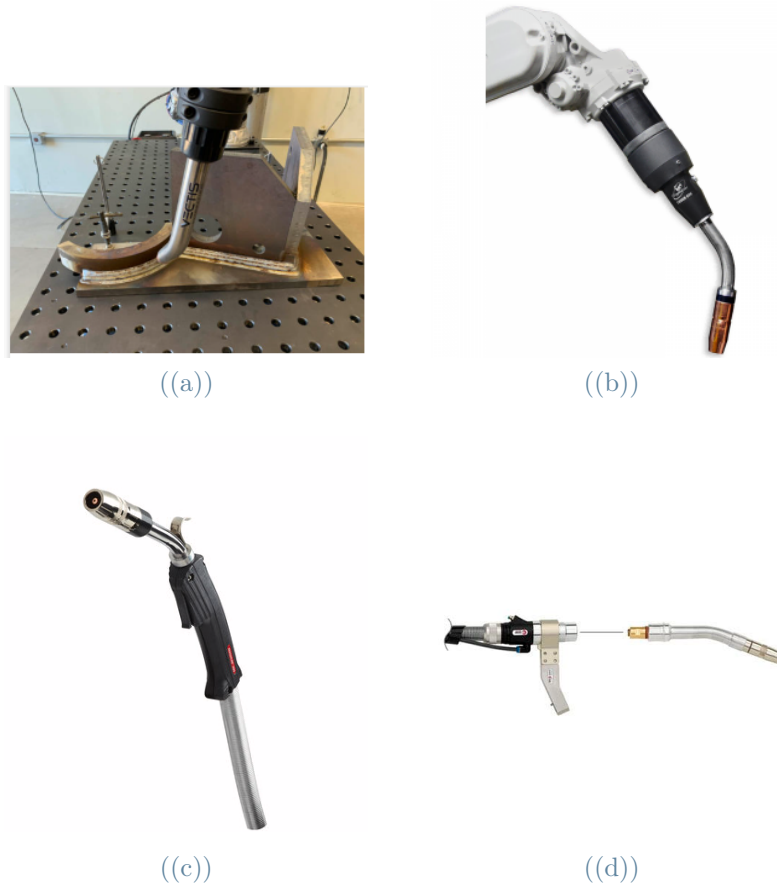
Different types of collaborative robot for welding tools
